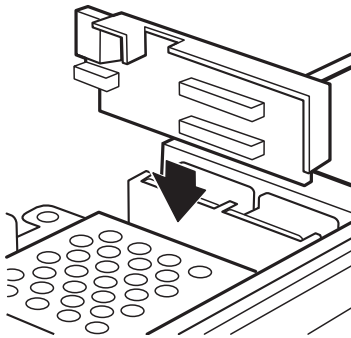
Lowering the SAS IF Assembly into the Chassis
